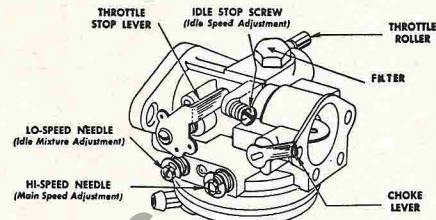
View showing location of adjustment points on Brown carburetors used on some engines. Refer also to Figs. HL5 and HL7.
